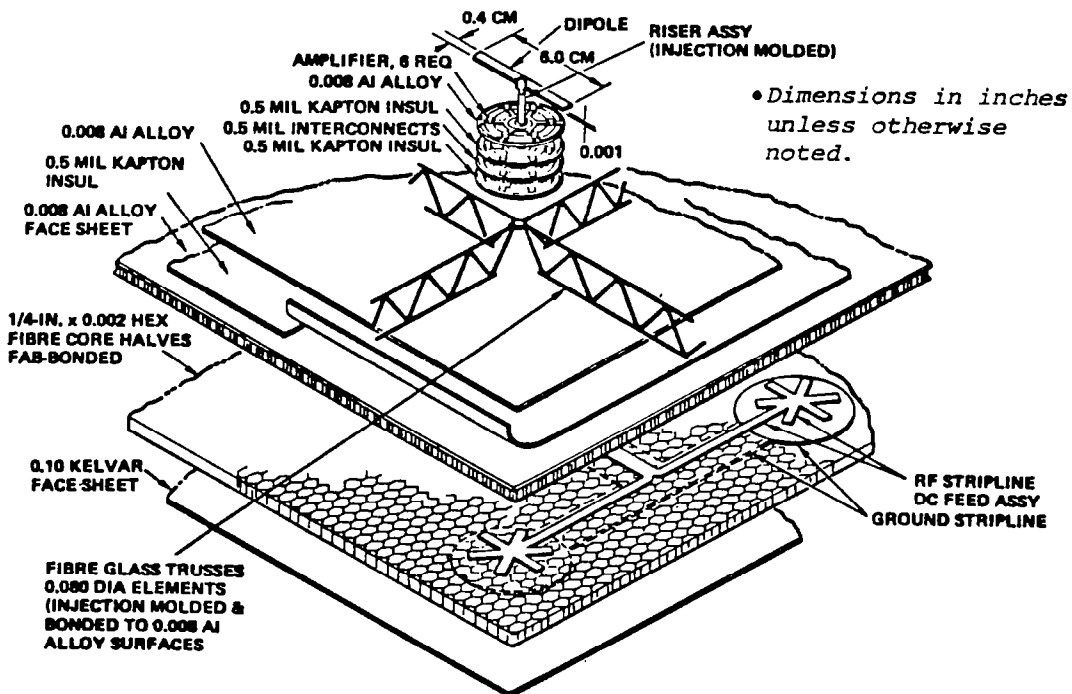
Dipole Amplifier Assembly—Exploded View Solid-State End-Mounted (Preliminary)
